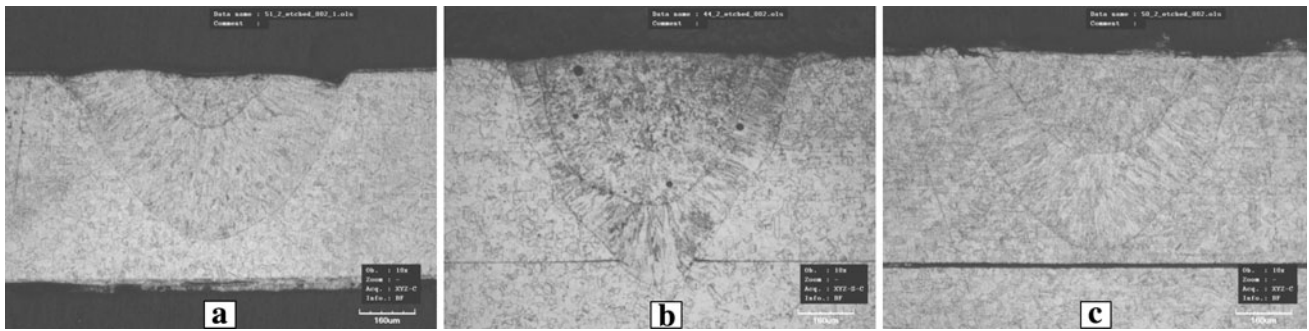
Weld cross section of sample prepared at 6.5 J (a), 7.1 J (b), and 8 J (c)
